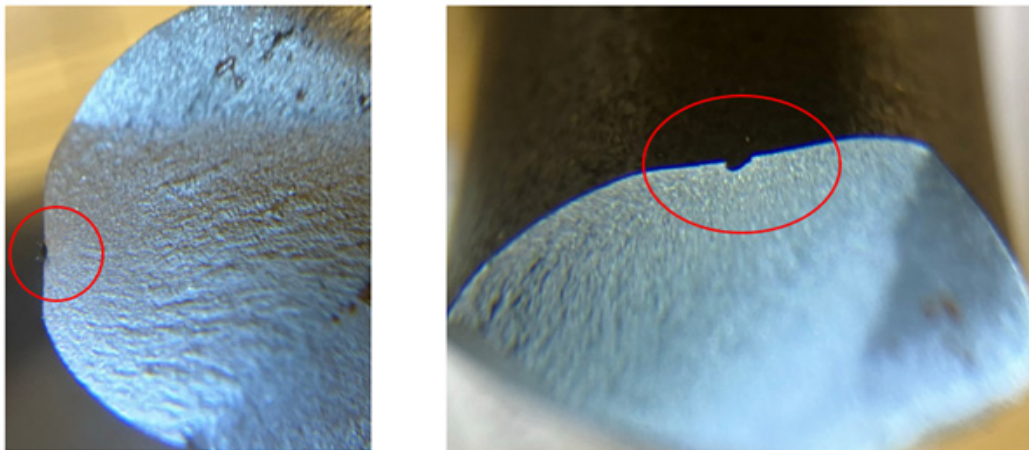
The fracture images of tested railway fastening clip performed using a loupe with a magnification of 40x.
